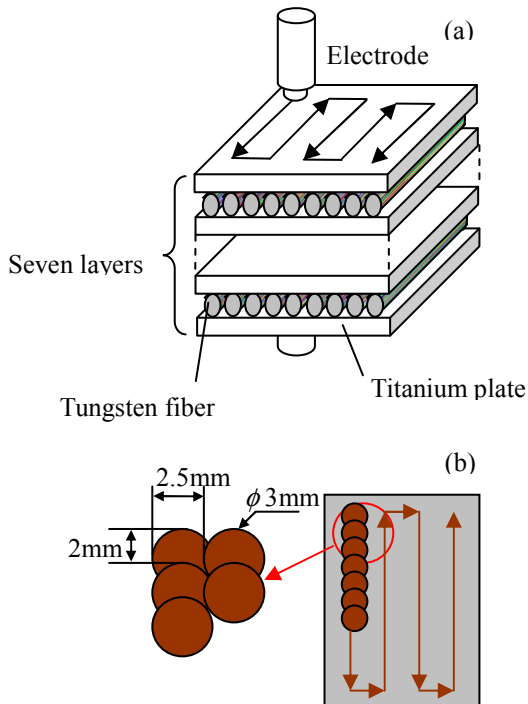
Schematic diagram of; (a) the manufacturing procedure by the spot welding method, (b) the spot welding positions which define the coverage for W/Ti composite.
